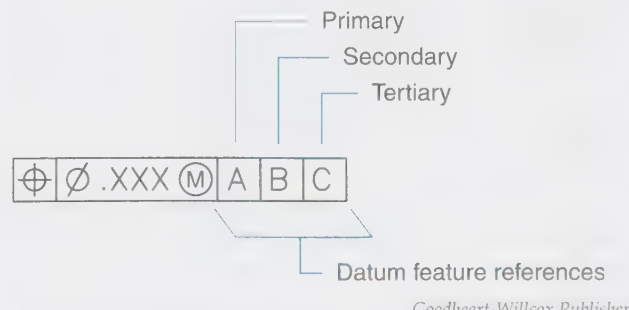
Datum feature references are included on the right end of the feature control frame. They are read from left to right.
